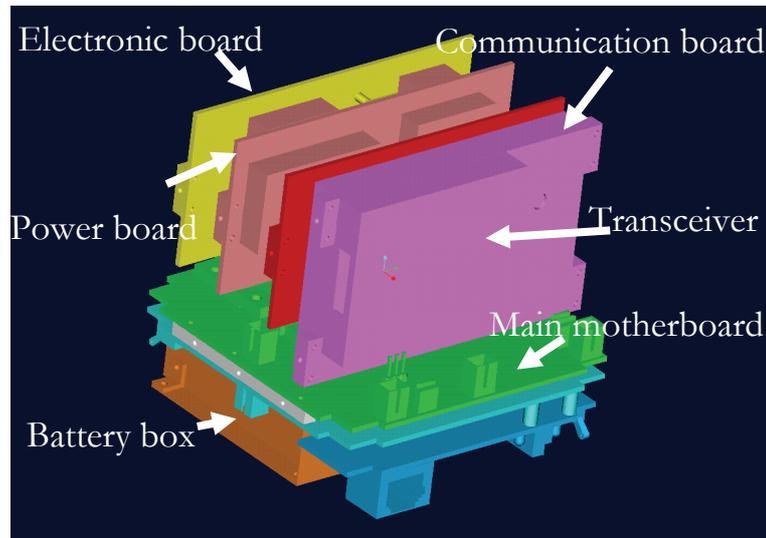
Arrangement of the PCB in slot (University of Tokyo).
